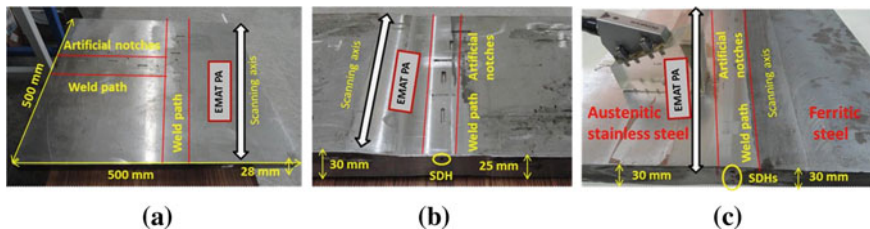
PFBR main vessel mock-up weld samples with artificial defects. a, b AUSS weld plates and c DMW plate
